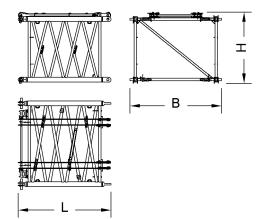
2821 boom section dimensions 10 ft for LR1300SX/LR1300SXW
